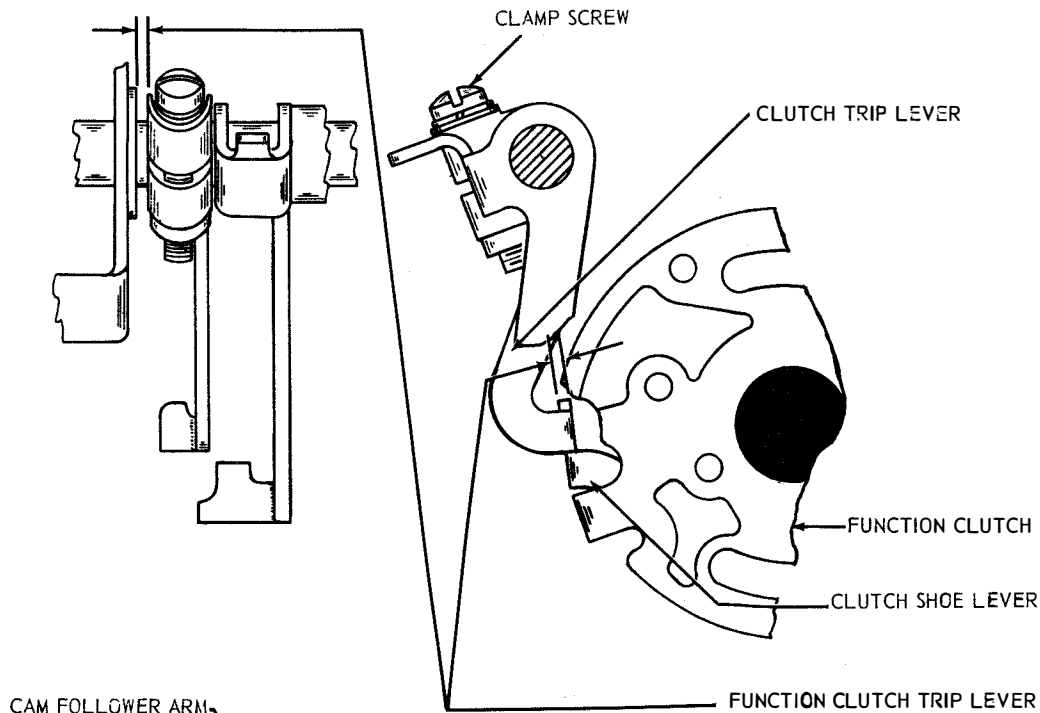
TYPING UNIT, CODE BAR CLUTCH TRIP SHAFT MECHANISM
